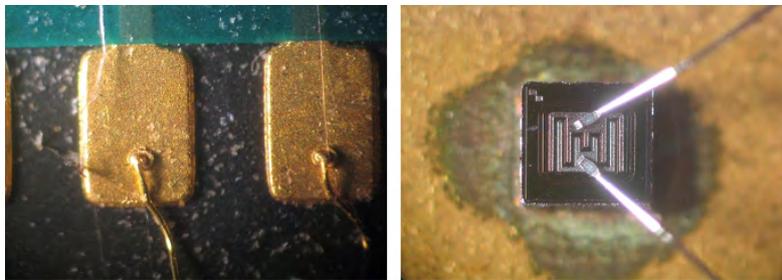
examples of wirebonding: gold wire ball-bonded to a gold contact pad (left) and aluminum wires wedge-bonded to a naked die (right)
